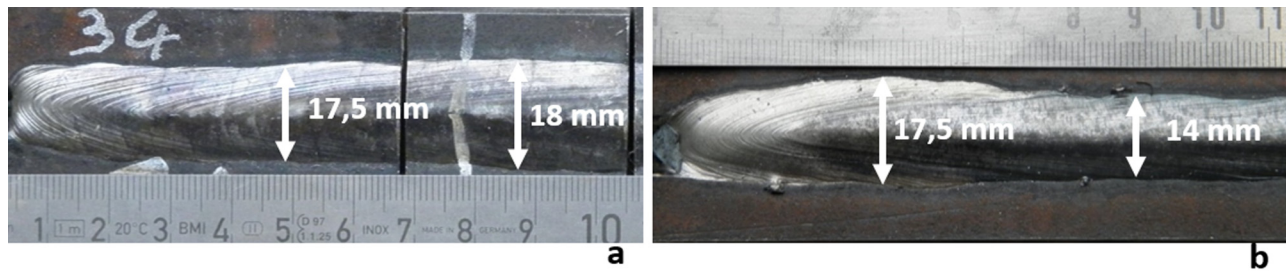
SA-LAHW weld upper bead, weld start region;  $D_{LA} = 20$  mm (a);  $D_{LA} = 14$  mm (b).
